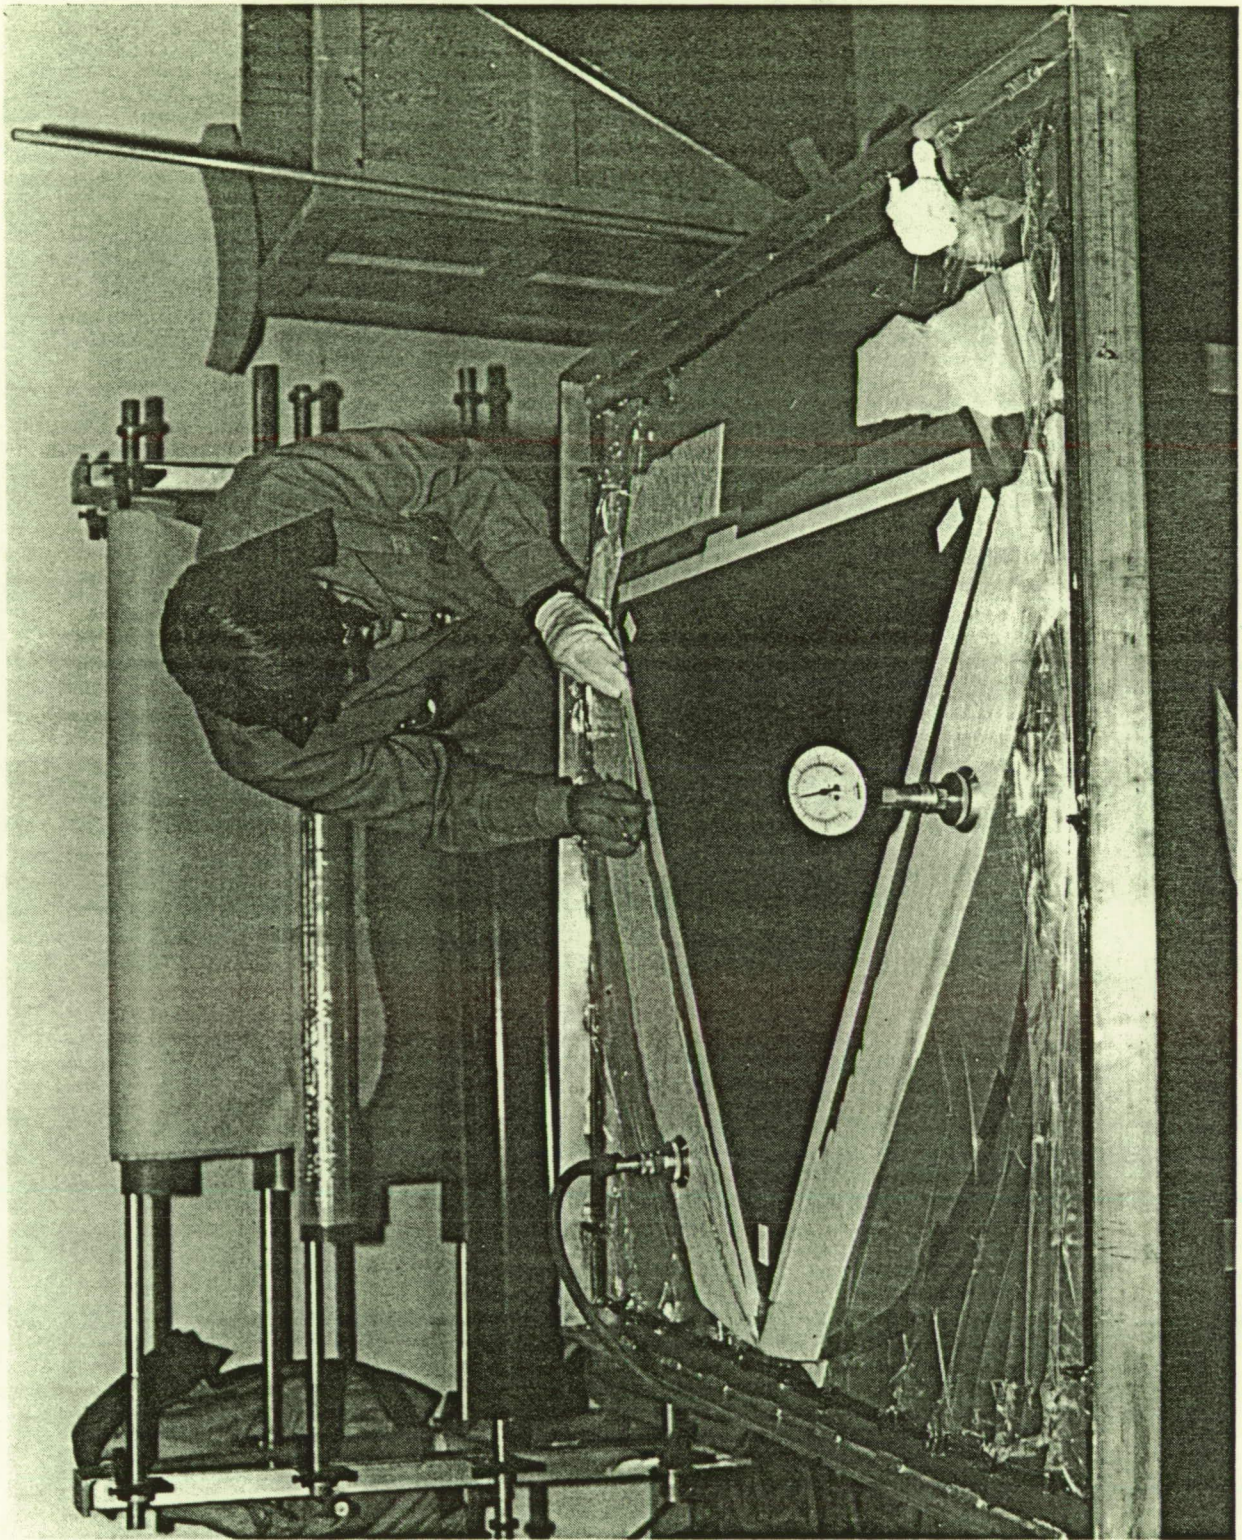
The reflective face skin is placed on the bond tool, vacuum bag is sealed to the tool and to the edge of the face skin when vacuum pressure is applied, gage reading of about 20 in Hg is obtained. This process was only used for the vapor deposited metal facets
